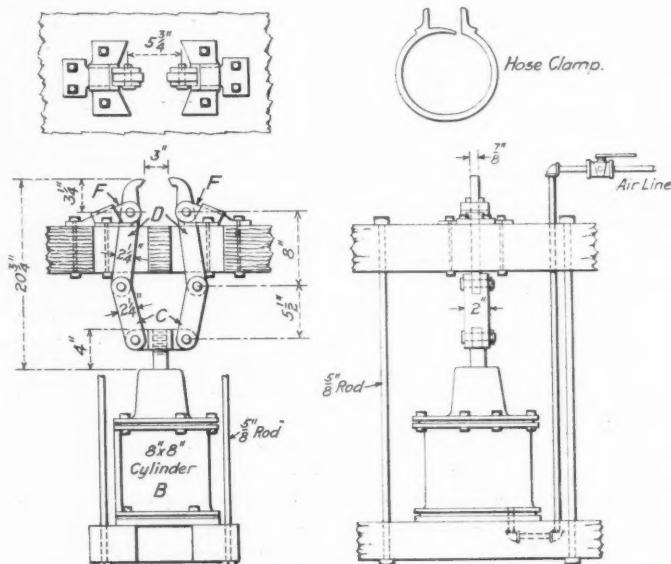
Arrangement for Use in Clamping Air Hose to Coupling
